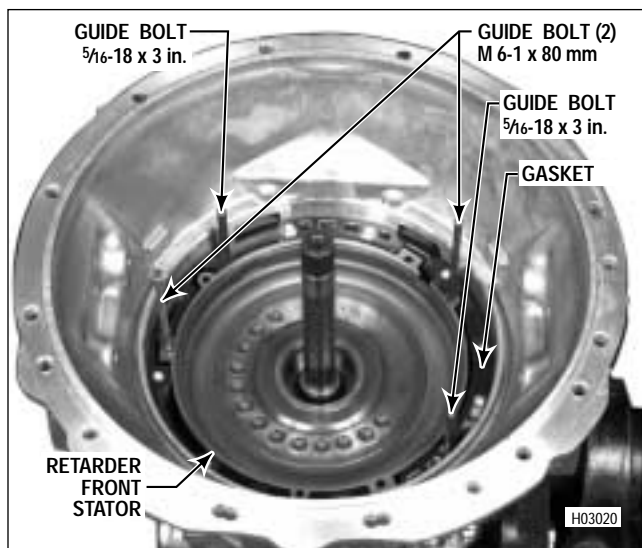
Installing Retarder Front Stator (Models With Retarder)
